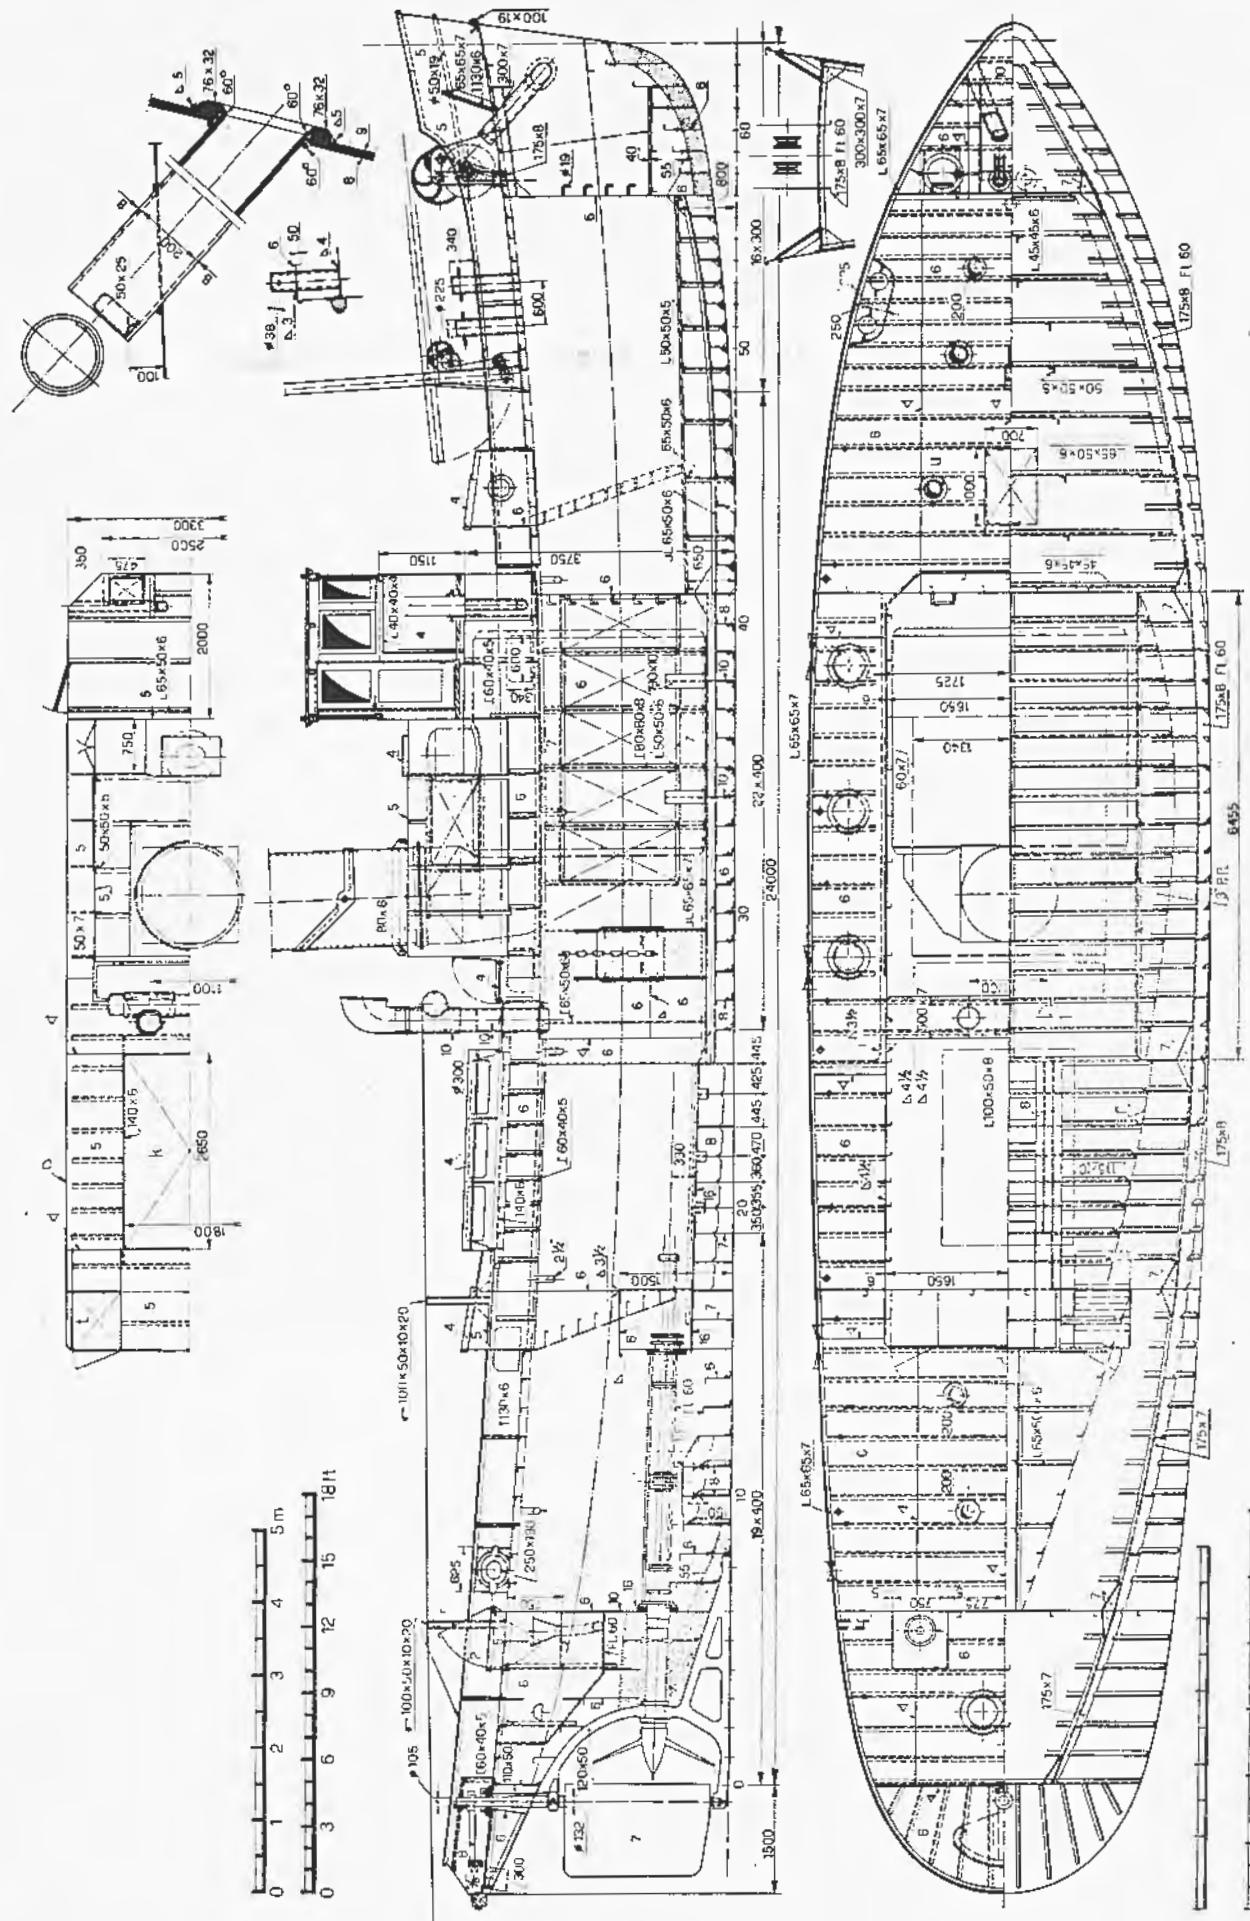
Steam tug 24 x 5.50 x 2.60 m. Structural Plan
